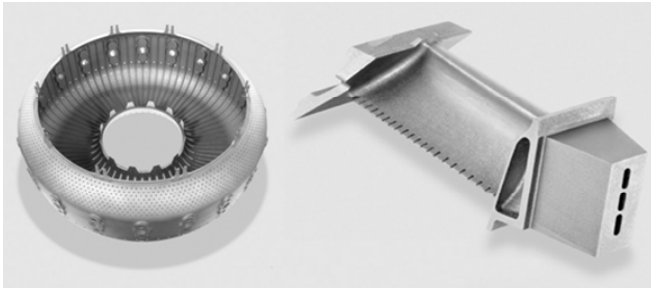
Aero engine structural components (combustion chamber, turbine blade) produced by SLM [16]
